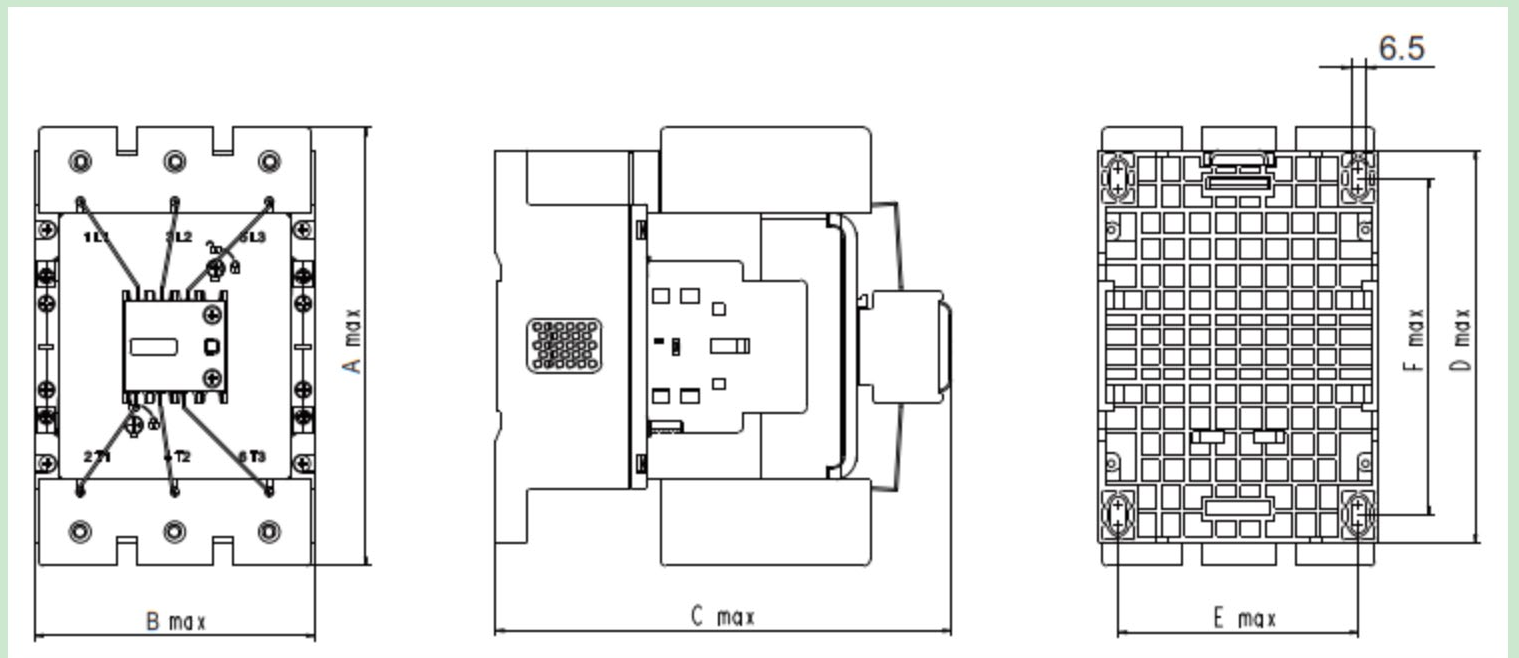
Outline and installation dimensions of CDC19s-150, 170
